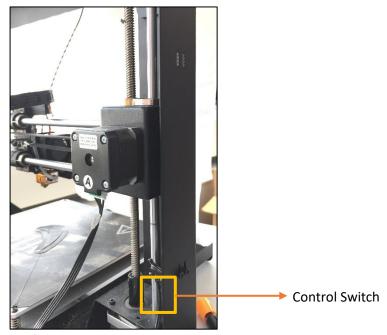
Z-axis shaft and control switch in IIIP Monoprice printer
